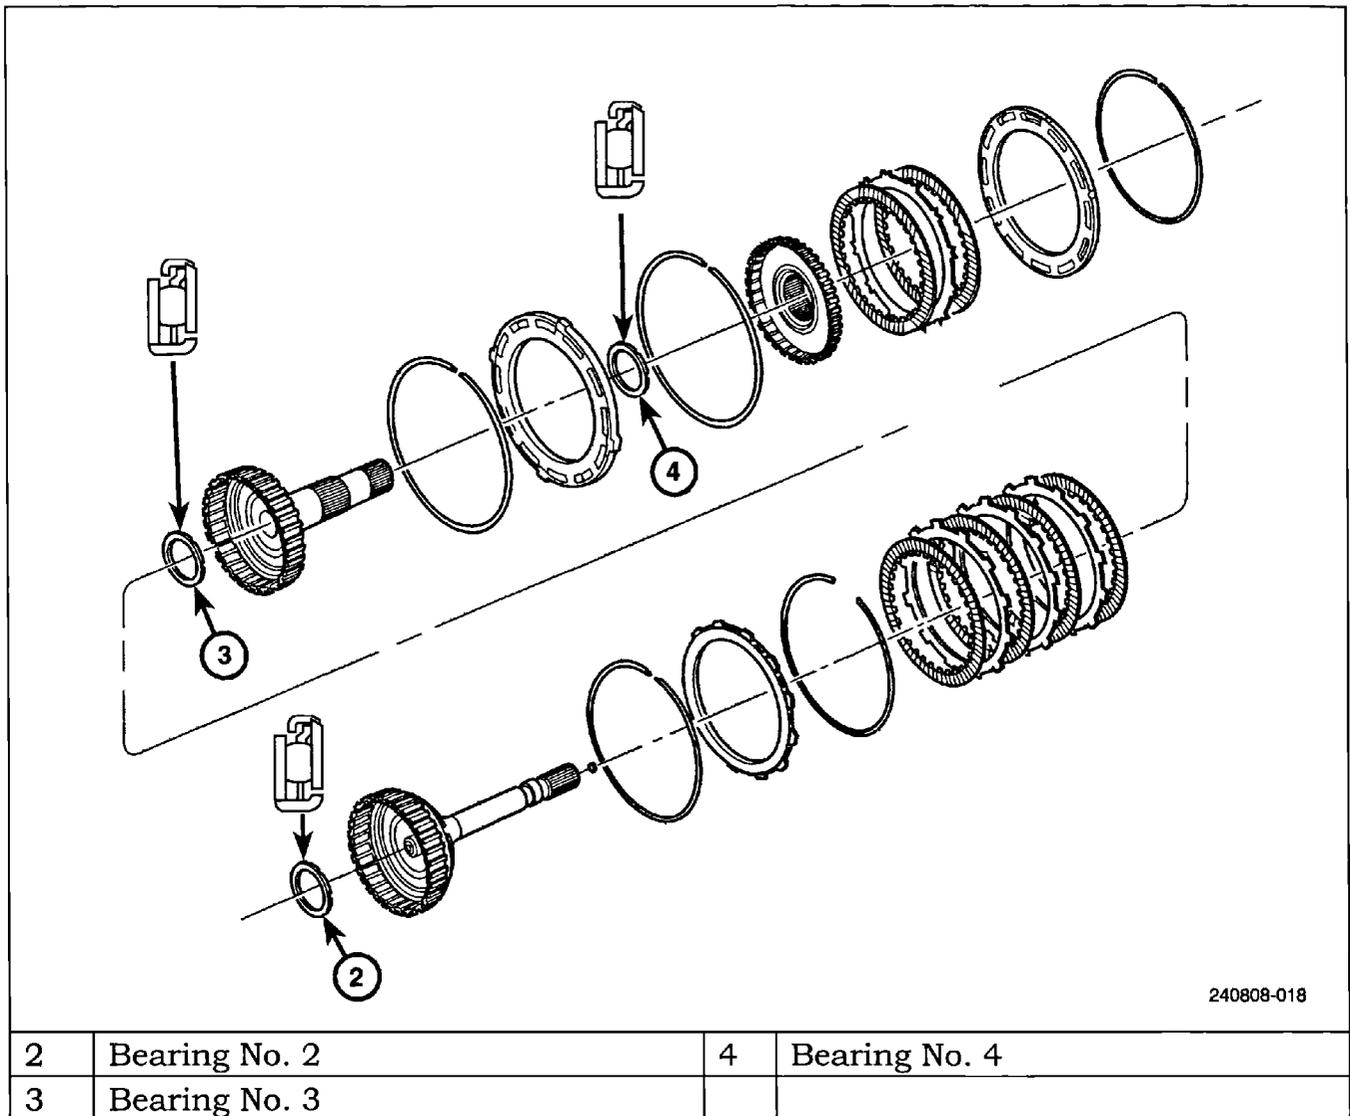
Input Clutch Assembly Roller Thrust Bearings
